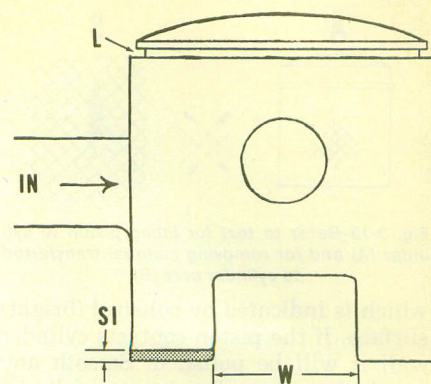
Some pistons designed for high speed operation use an "L" shaped ring. Cutting bottom edge of piston skirt (SI) off will cause inlet port (IN) to open sooner. Slot (W) in lower edge of piston should match with similar openings in cylinder with piston at Bottom Dead Center.
